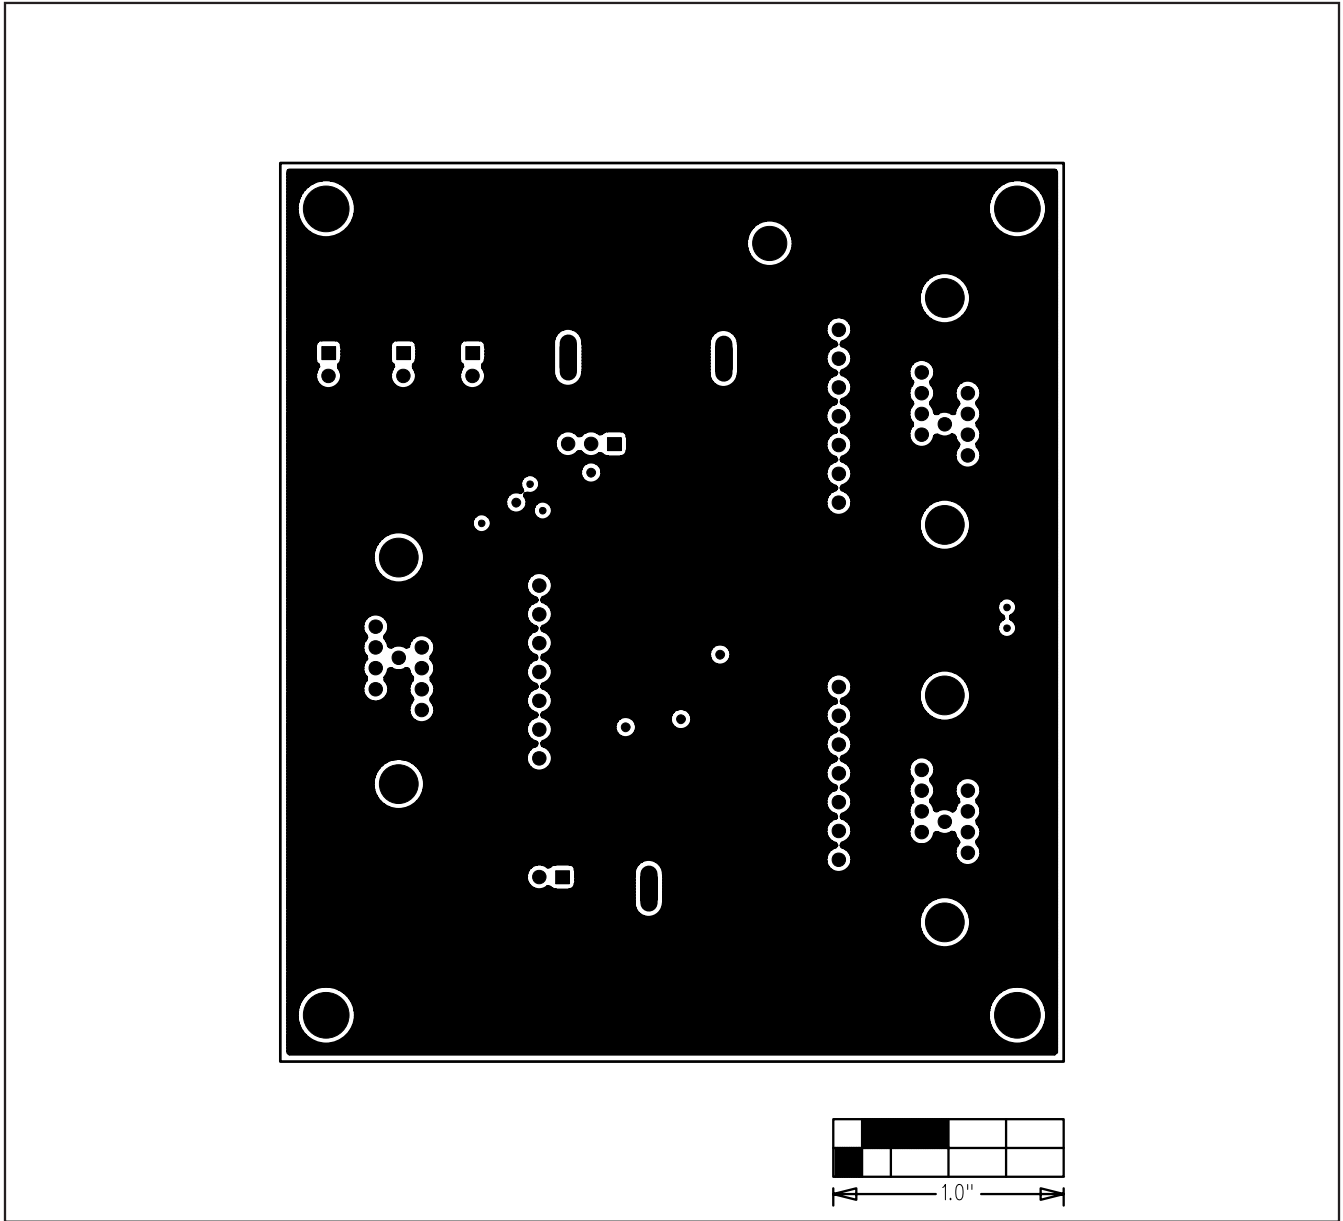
MAX4885 EV Kit PCB Layout—GND Layer 2
